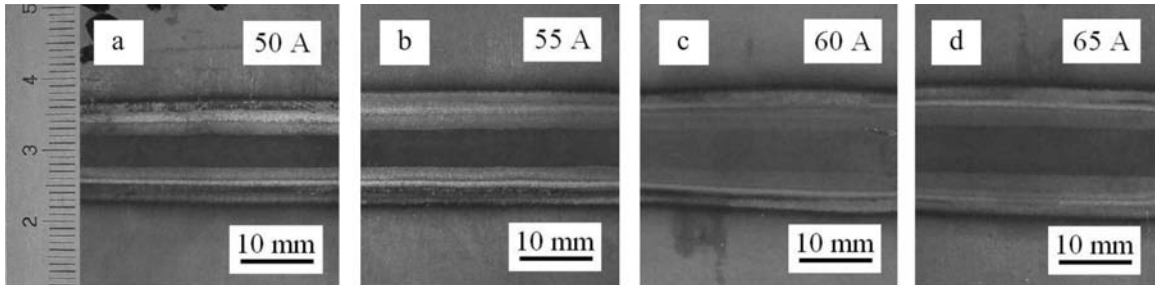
d. Top view of the weld beads obtained at different welding currents in PAW.
